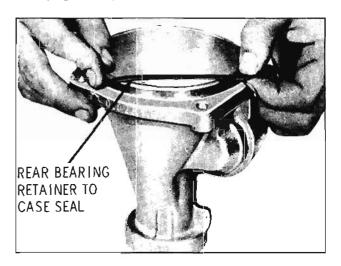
Installing Rear Bearing Retainer to Case Oil Seal
